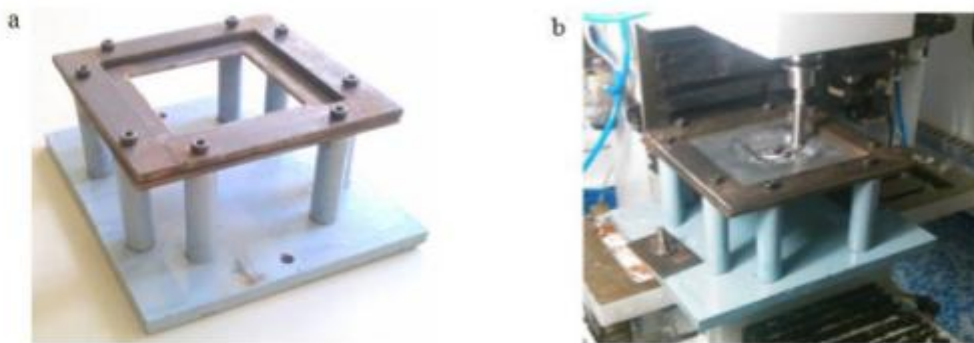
(a) Fixture to hold sheet metal and (b) fixture with sheet metal mounted on CNC machine
